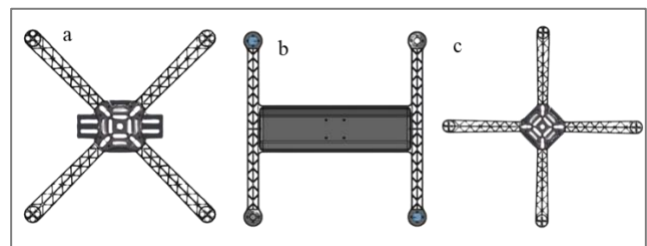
Quadrotor frame types: a) cross-shaped frame, b) H-shaped frame and c) plus-shaped frame.
